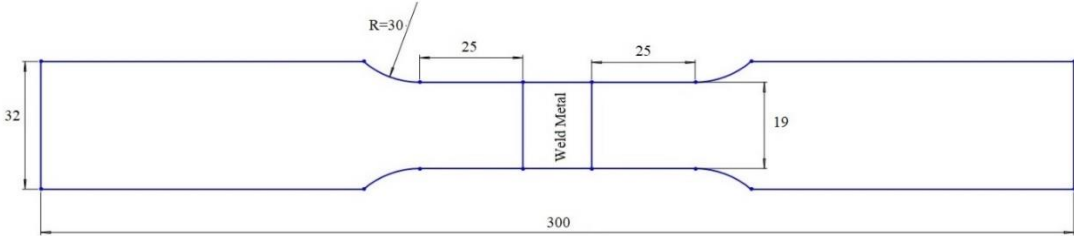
Top view of transverse (cross weld) tensile test specimen.
